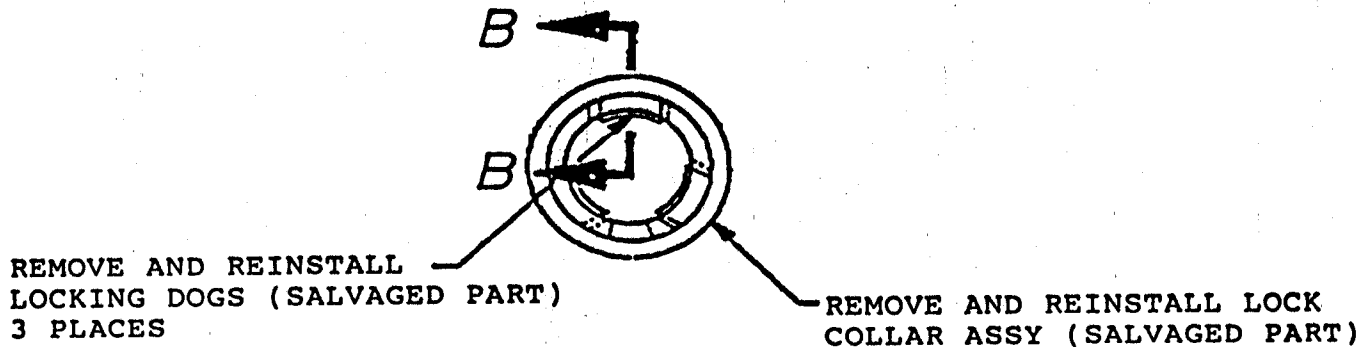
STRUT ASSEMBLY A2956-5A
